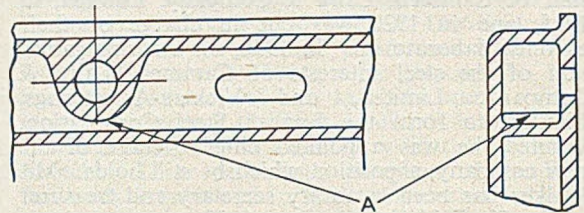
PORTION OF WATER-JACKETED CYLINDER-HEAD CASTING SHOWING HOW METAL PENETRATED TO A CORE VENT.
